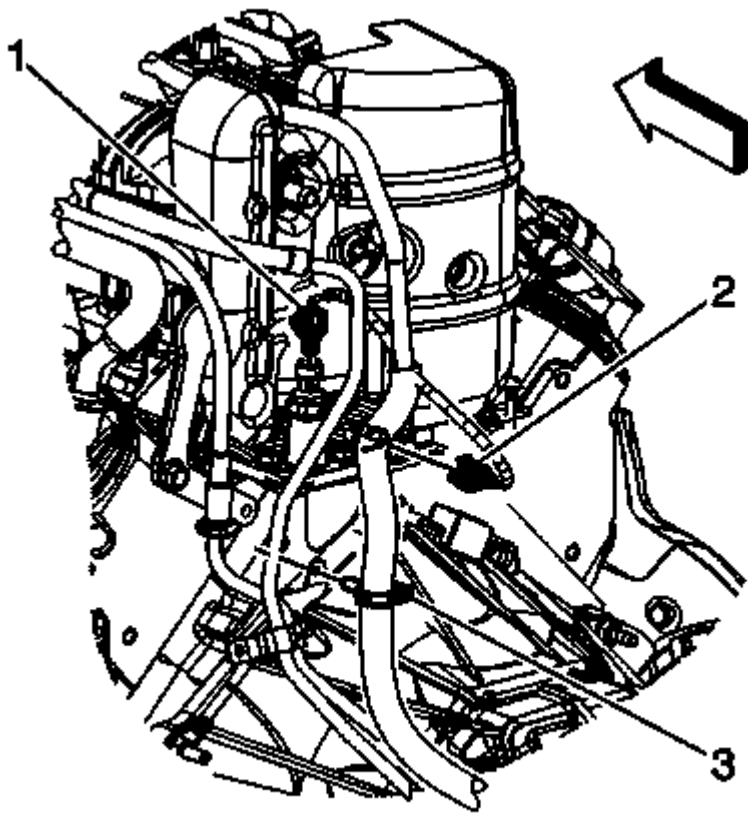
Engine Harness Electrical Connectors And Inlet Hose Clamp
